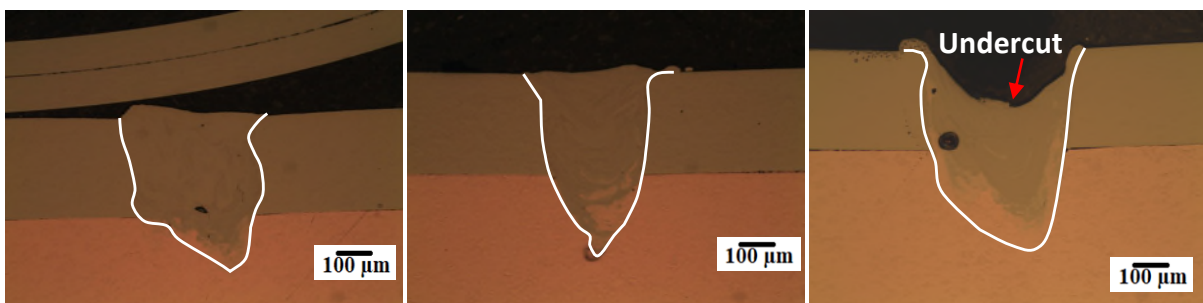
Macro view of the laser-welded Ni tab to Cu busbar at (a) under-weld, P= 675 W (b) good-weld, P= 975 W and (c) over-weld, P= 1275 W
